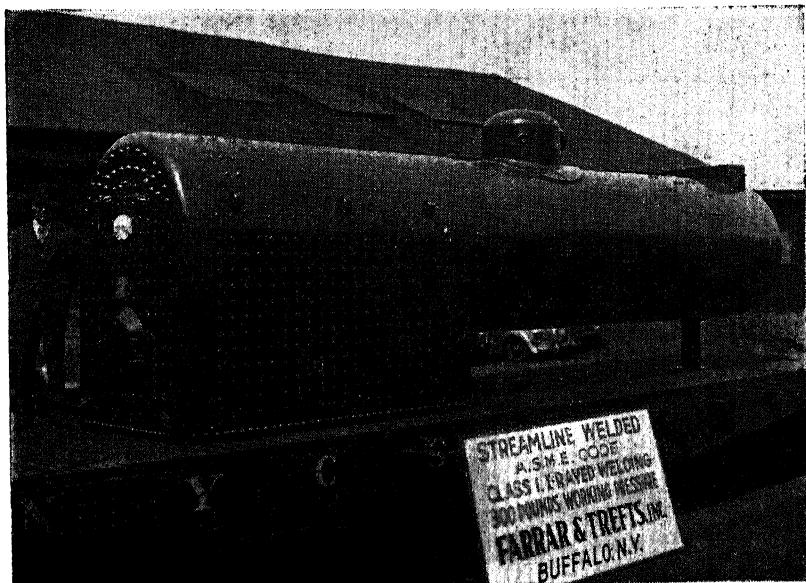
Welded steel boiler for oil field service meets A.S.M.E. U-68 requirements. For 130 hp., 300 lbs. working pressure. Eliminates leaks common to riveted boilers of this type and reduces weight 10%. Welds were produced with Type C deep groove electrode and were X-rayed.
